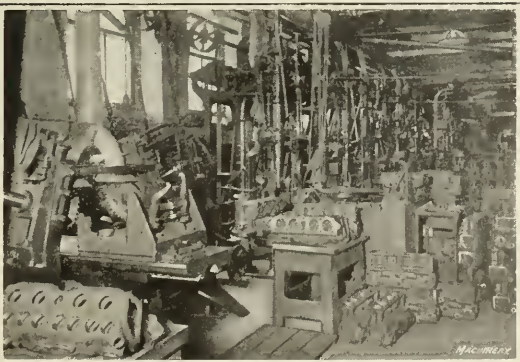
In the cylinder department of the Cadillac Motor Car Co. there is a stand between each pair of machines, of the same height as the machine tables, so the operator does not have to stoop. Castings are swung from machine to stand and thence to next machine
